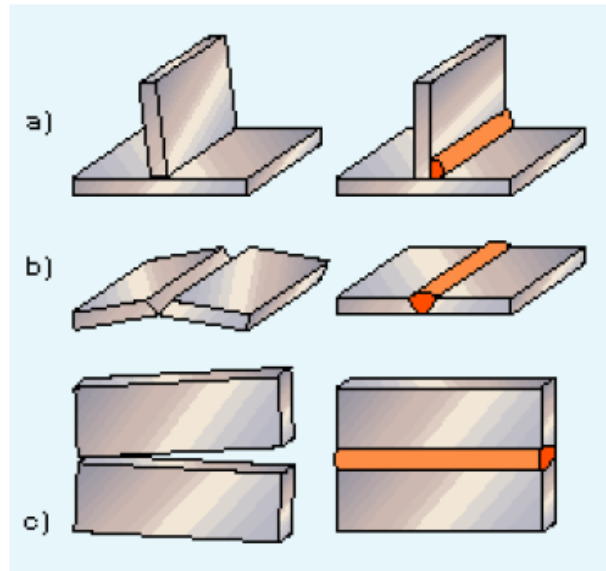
Pre-setting of parts to produce correct alignment after welding
